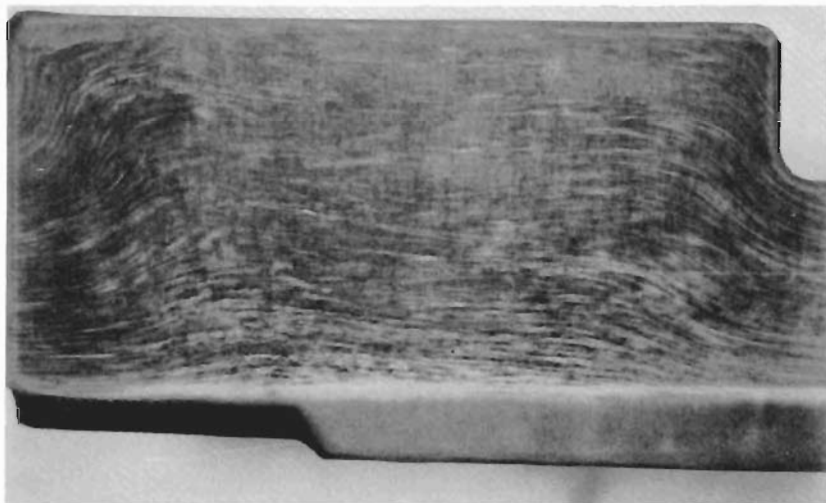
Longitudinal section through the center of a spur gear tooth, 1/2×. Macroetched to show material flow lines after forging and machining.
